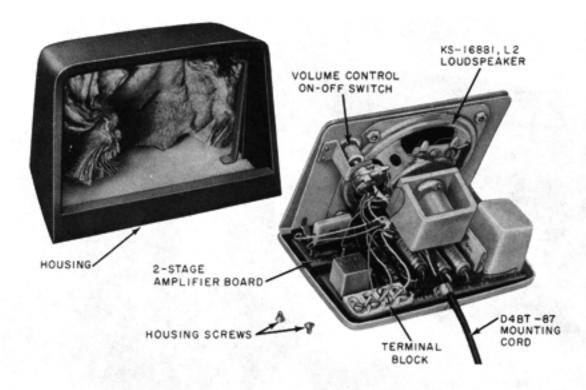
107A (MD) Loudspeaker Set, Cover Removed
